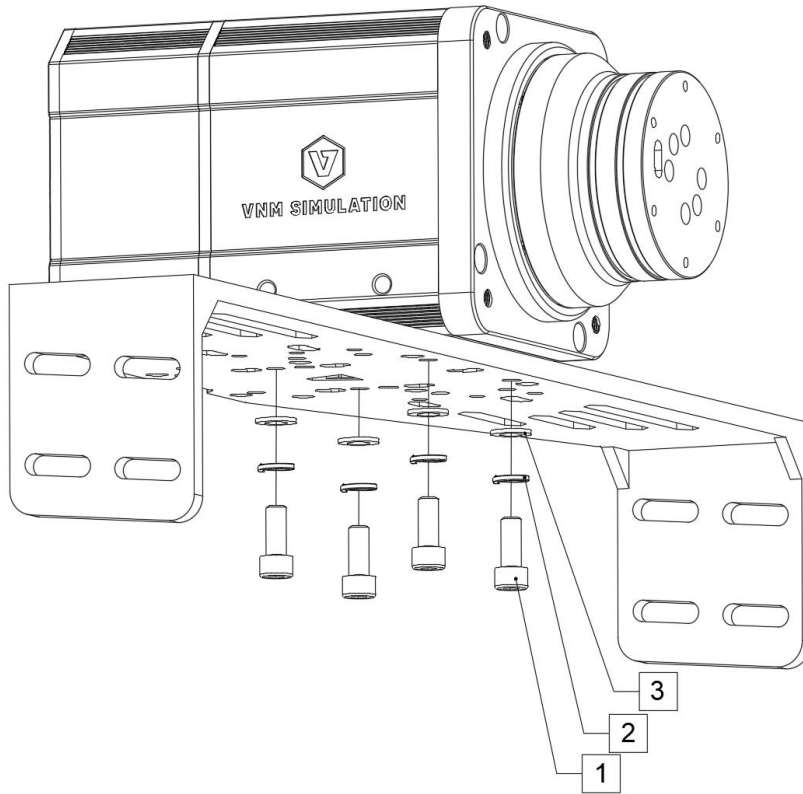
Mounting VNM Wheelbase Elite on bottom mounting bracket.
